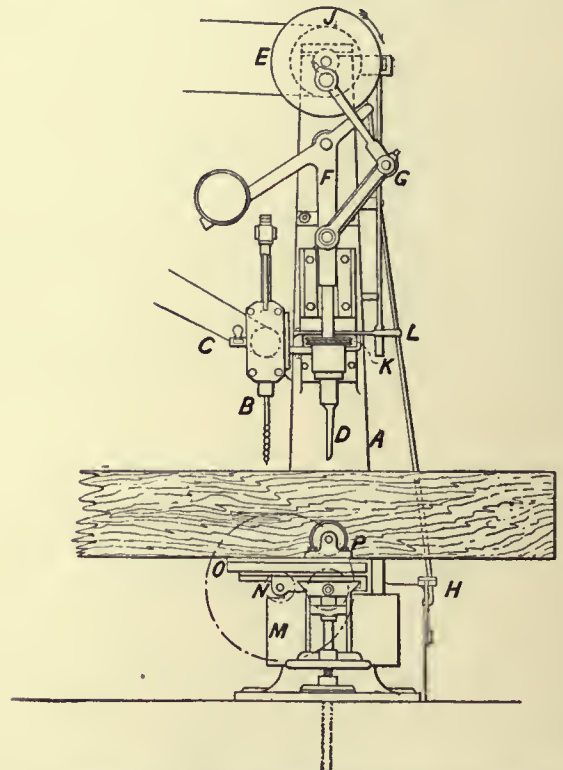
Mortising and Boring Machine with graduated stroke.
